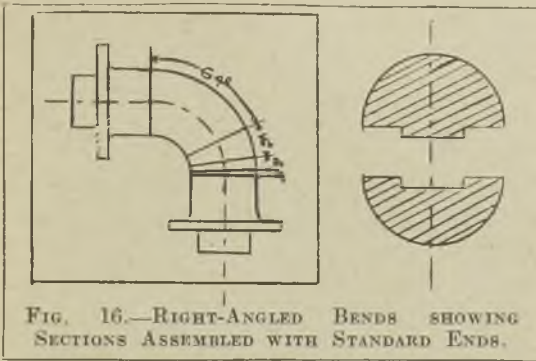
RIGHT-ANGLED BENDS SHOWING SECTIONS ASSEMBLED WITH STANDARD ENDS.
